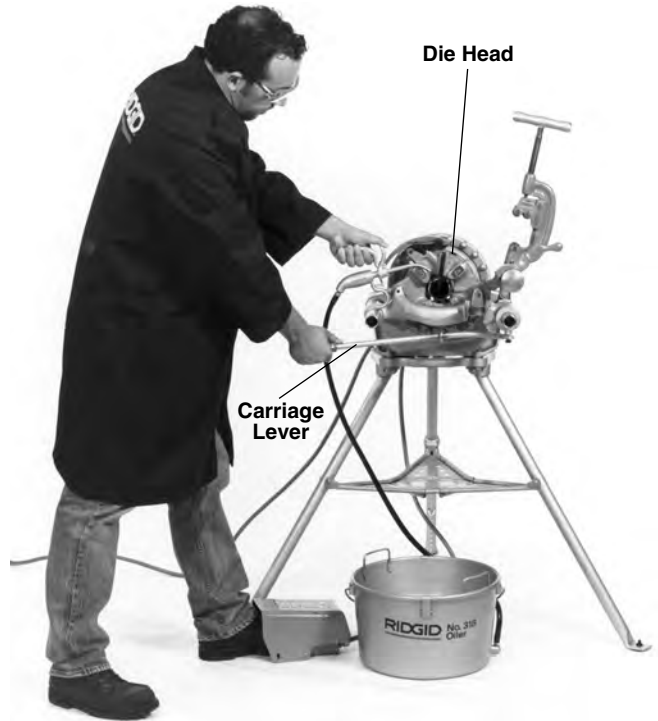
Threading Pipe with Quick or Self-Opening Die Head
